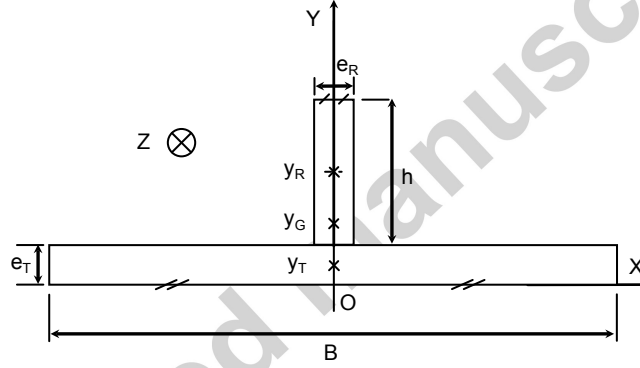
Geometrical parameters of the assembly's cross-section (stiffener and plate).
